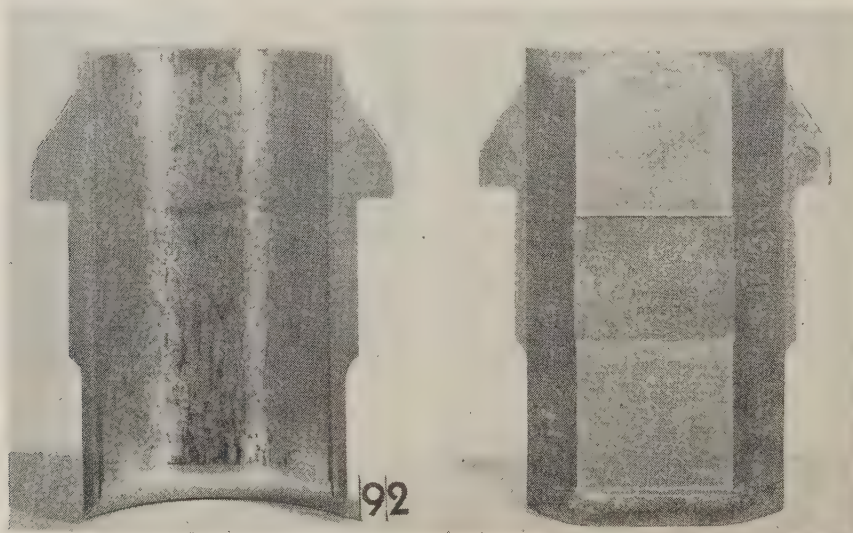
A.A.R. EMERGENCY BEARING 92; "MAGNUS SPECIAL"
